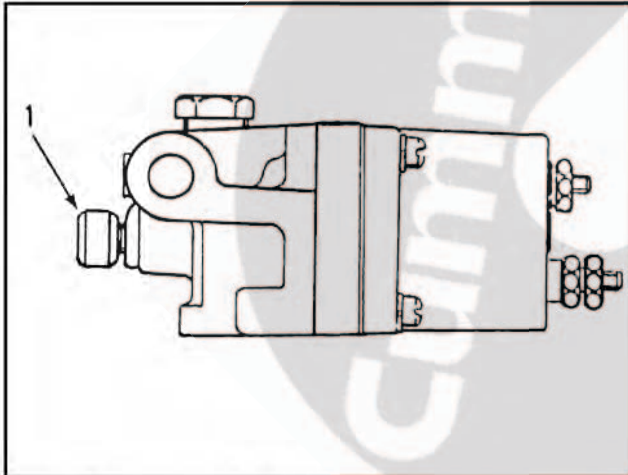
, (OM21000). Fuel pump shutoff valve knob
